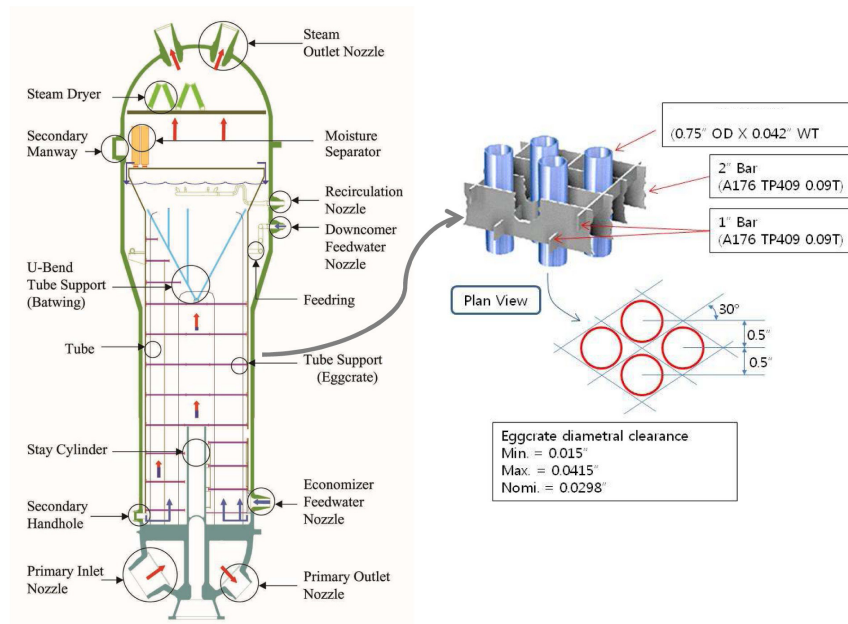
Steam Generator and Egg Crate Tube Support Plate
